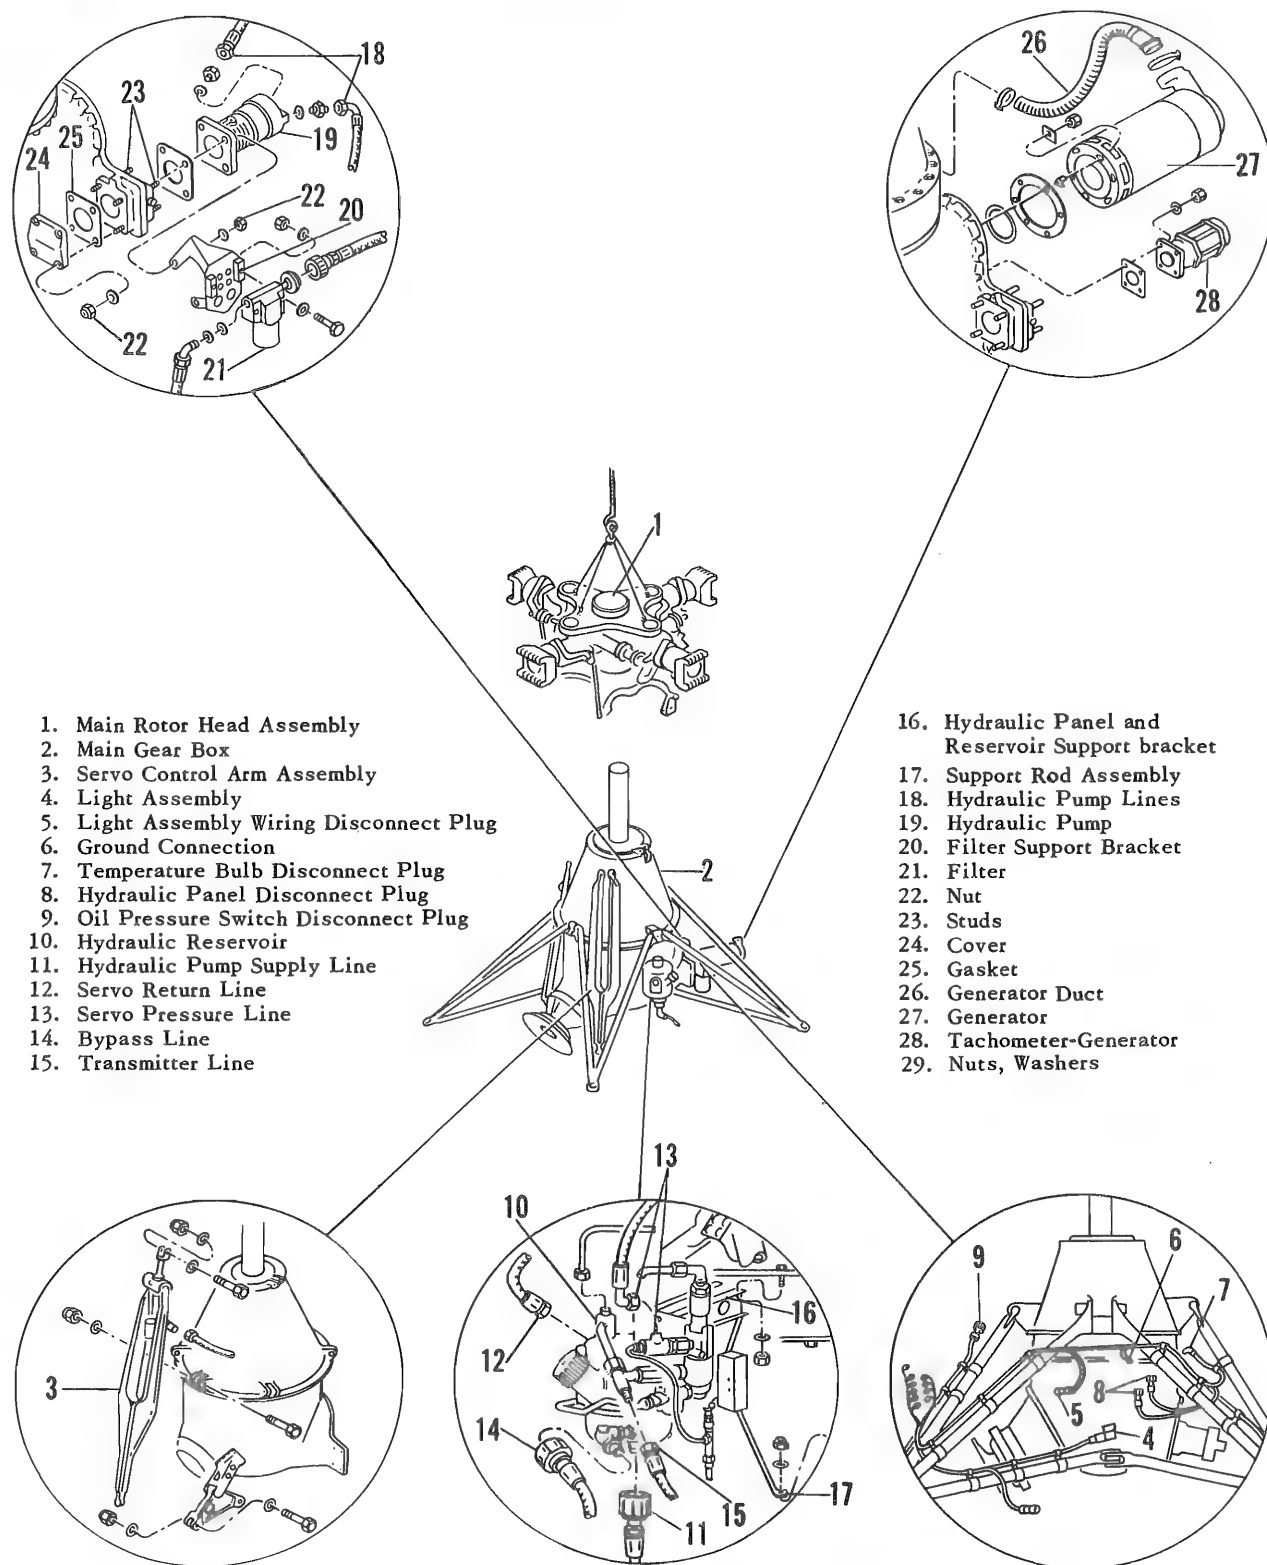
Main Gear Box and Rotor Quick Change Unit Disassembly (Sheet 1 of 2)
